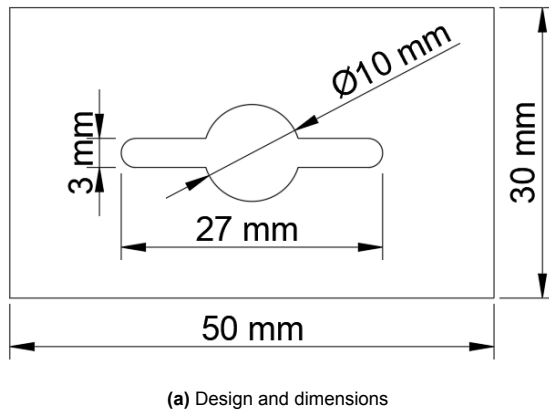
Steel slotted top plate for uniaxial tensile testing of laminated strip samples
